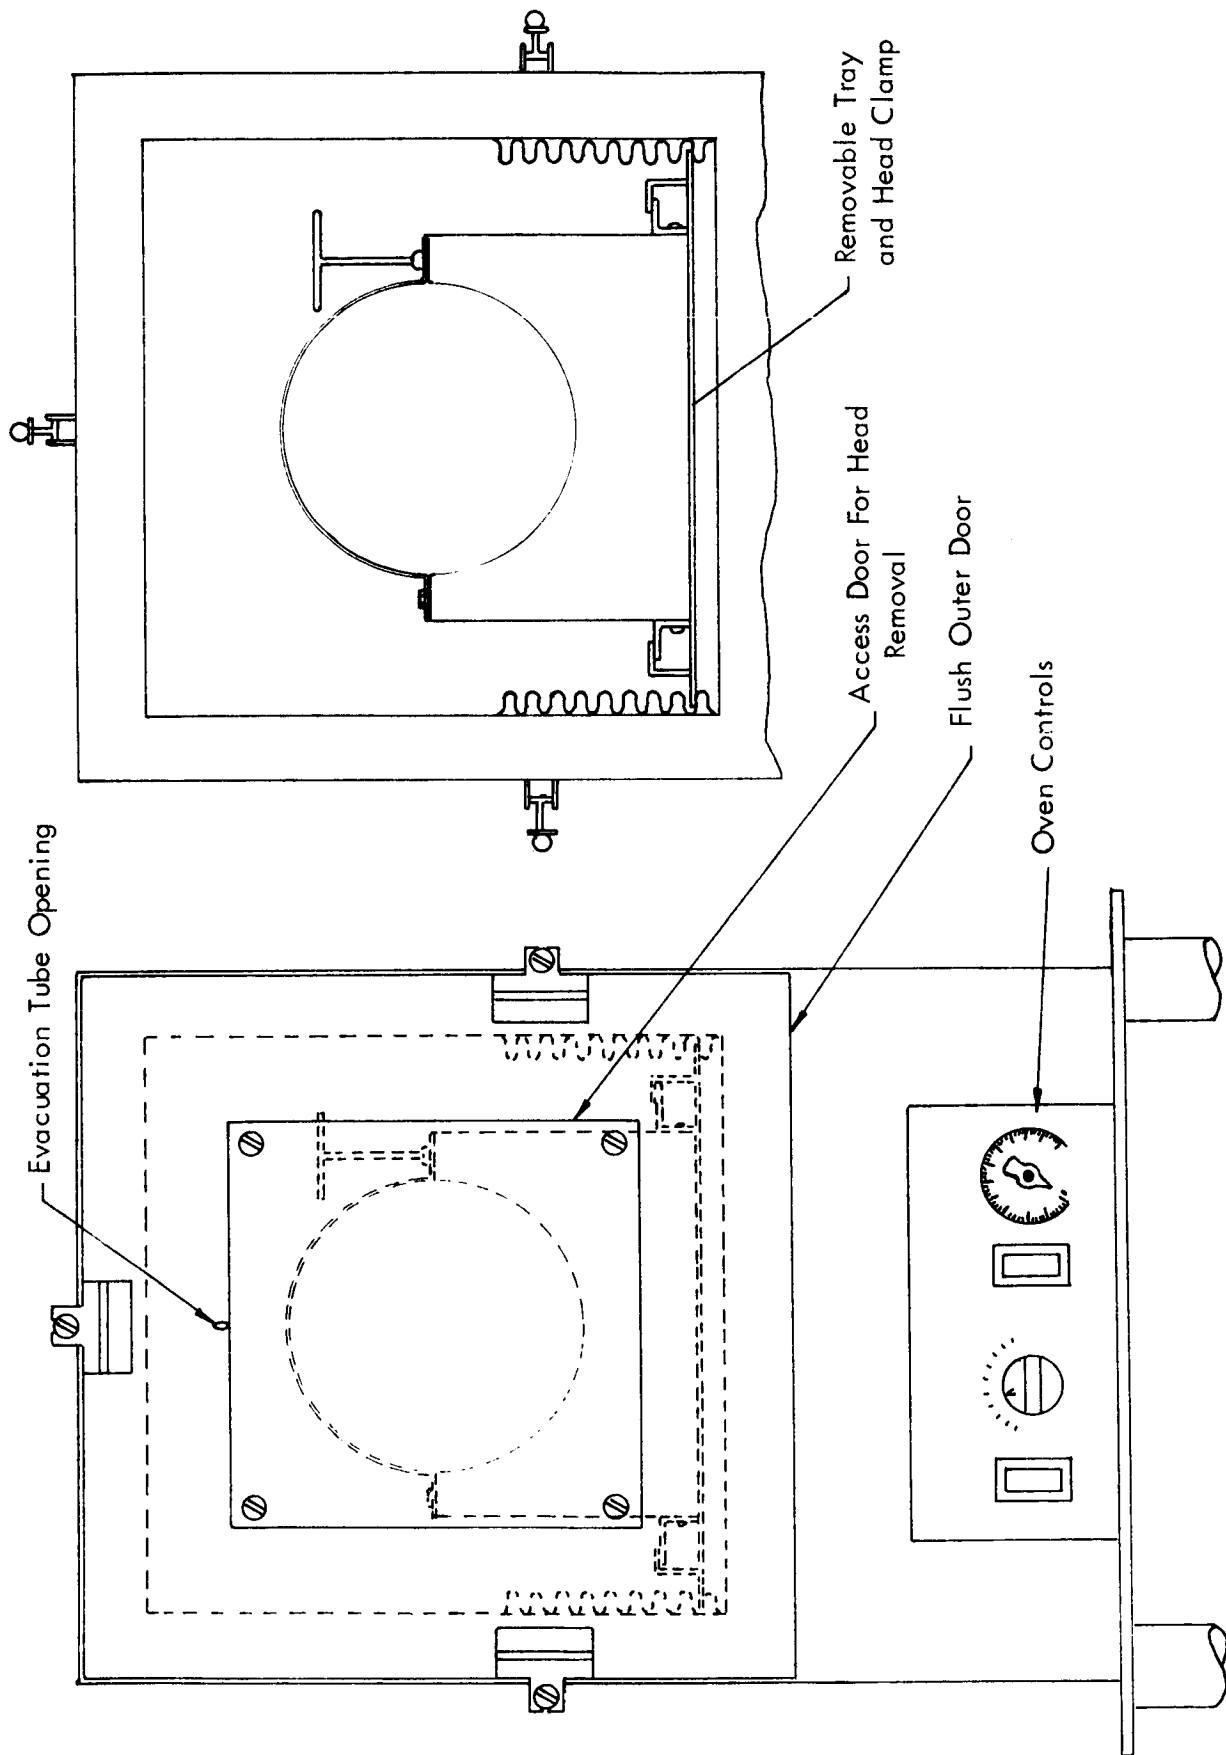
VACUUM BAKE-OUT OVEN MODIFICATION FOR REMOTE HANDLING TEST LOOP HEAD
